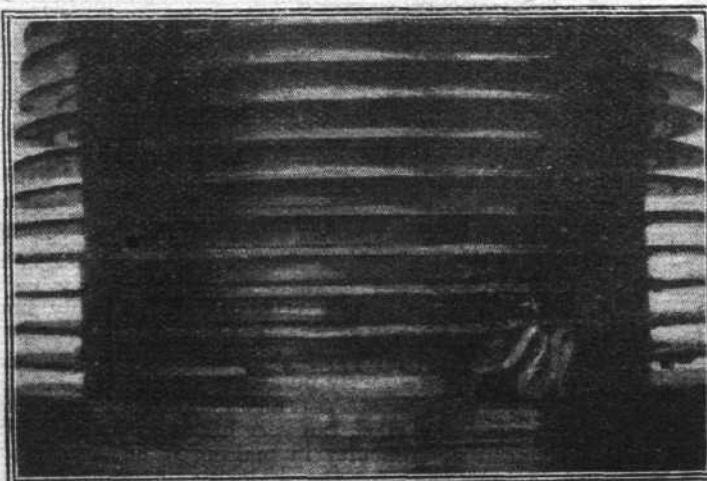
Aero engine cylinder, showing tearing of fins during machining.
